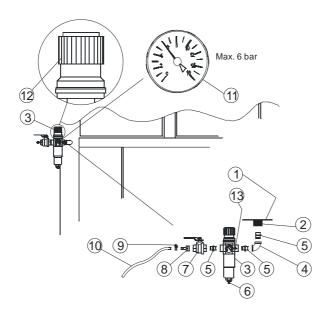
CONNECTION, ADJUSTMENT OF COMPRESSED AIR PARTS
